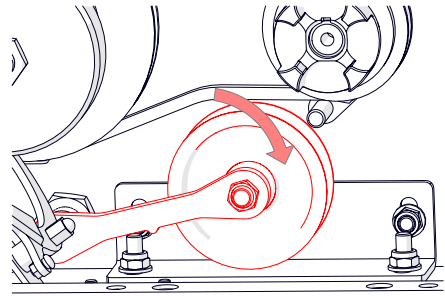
H - Adjust the pulley to avoid belt contact in disengaged state.
